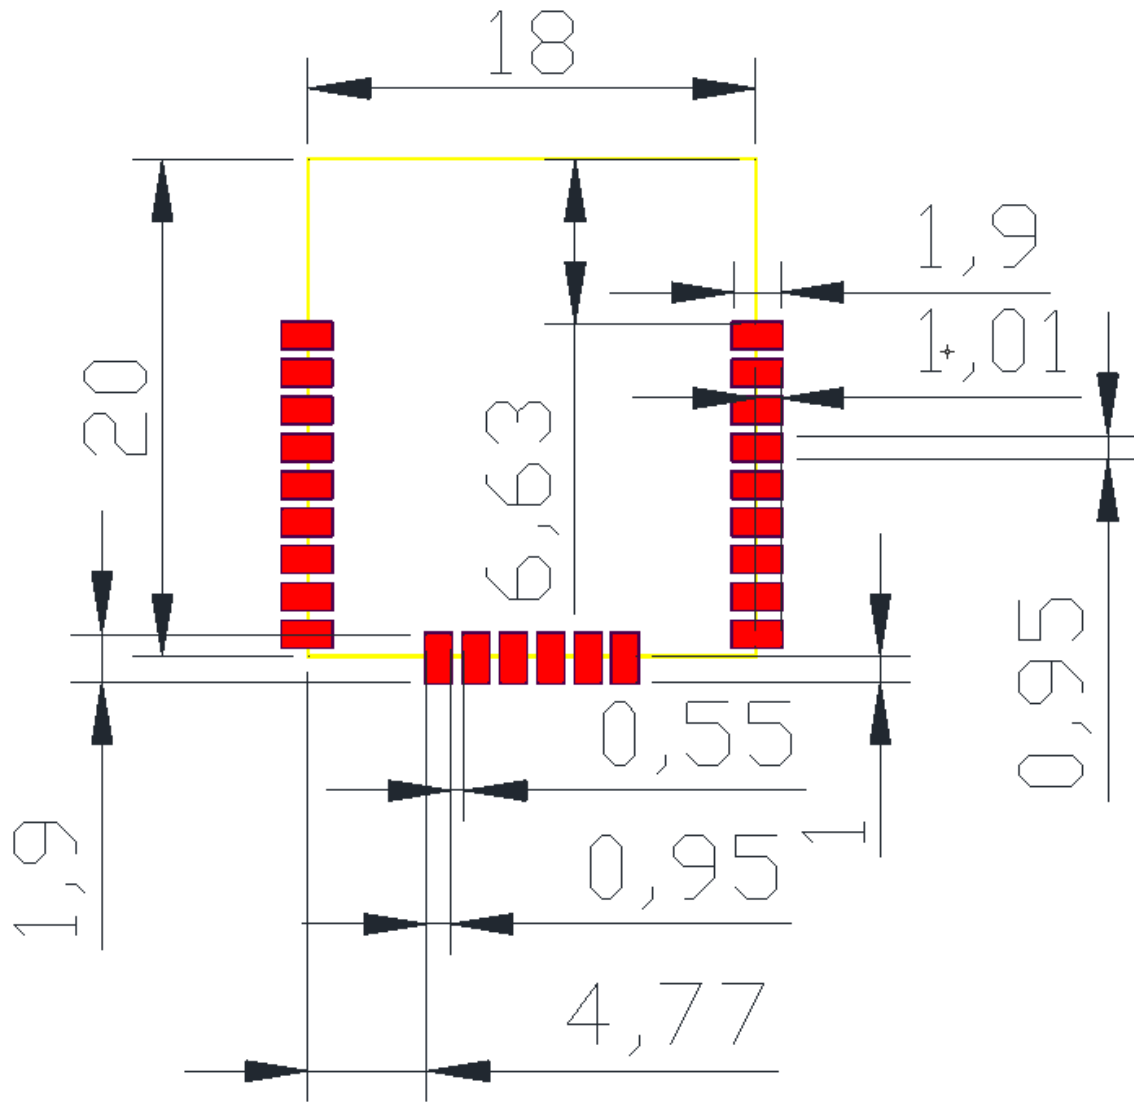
Stamp Hole Package Dimensions (Unit: mm)
